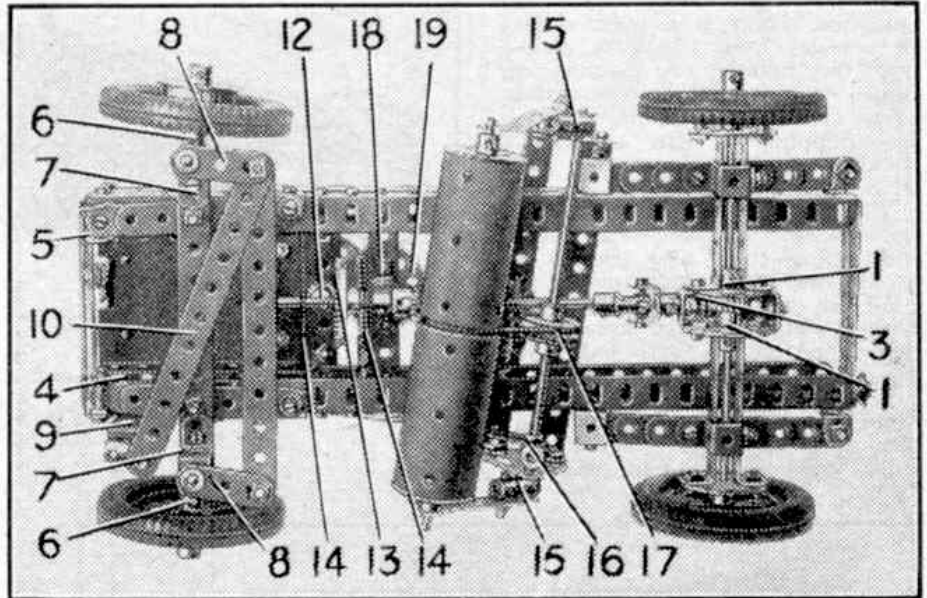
An underneath view of the model showing the transmission and the steering mechanism.
